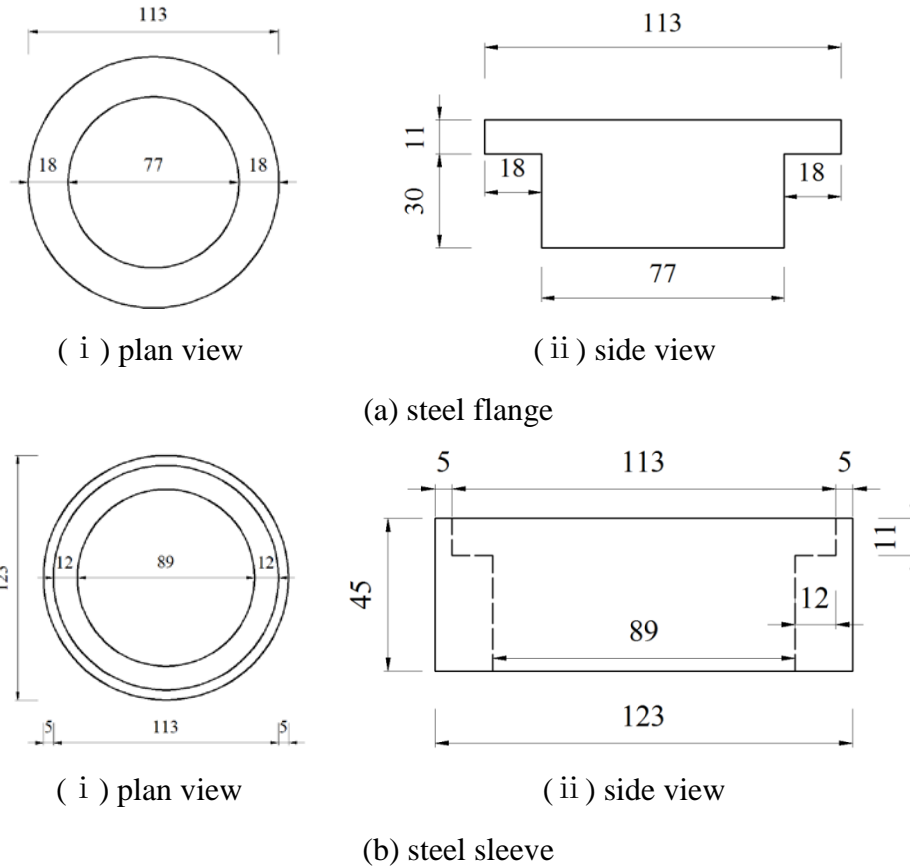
Engineering drawings of test fixture (Wang et al. 2015b)
